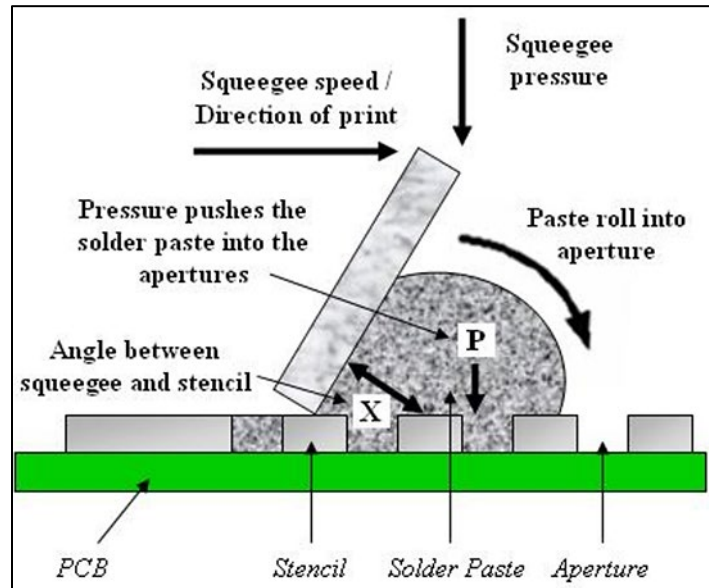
Cross-section representation of squeegee blade printing [33]
